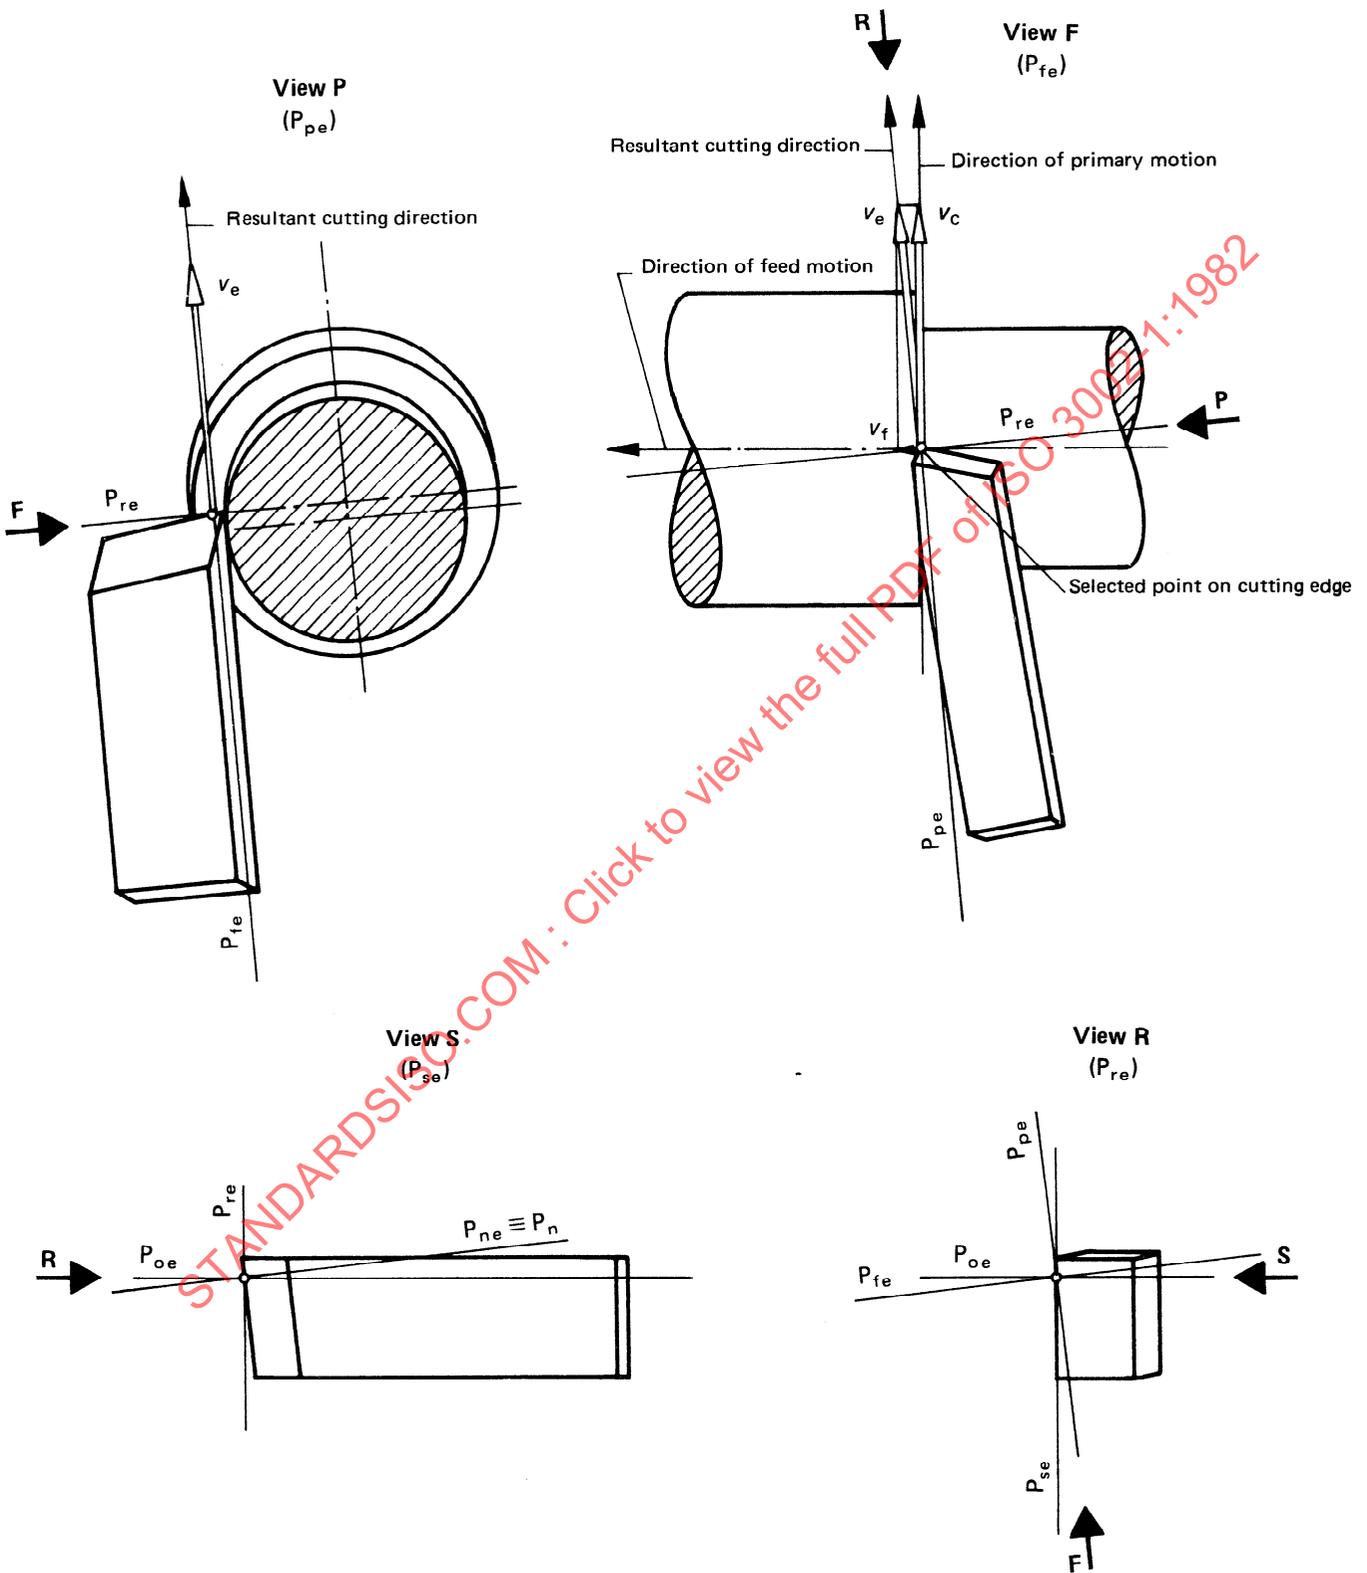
Planes in the tool-in-use system — Tangential turning tool
